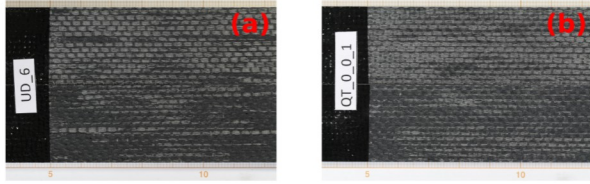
Example fracture surfaces: UD (a) and FUMD 0//0 (b) specimens.
